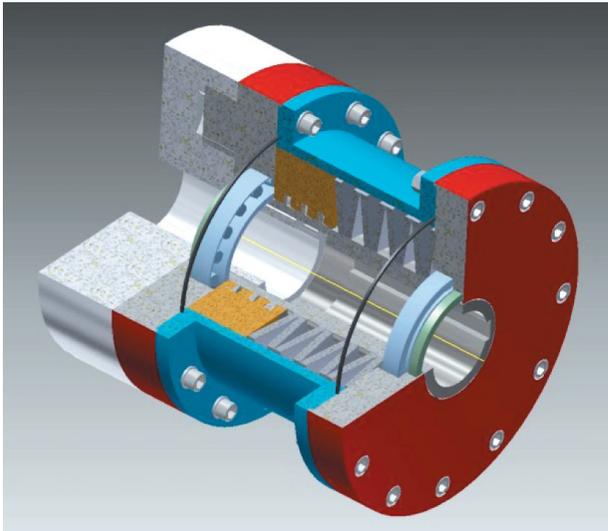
View of solid metal clutch model designed for 400-kW floor conveyor drive system
